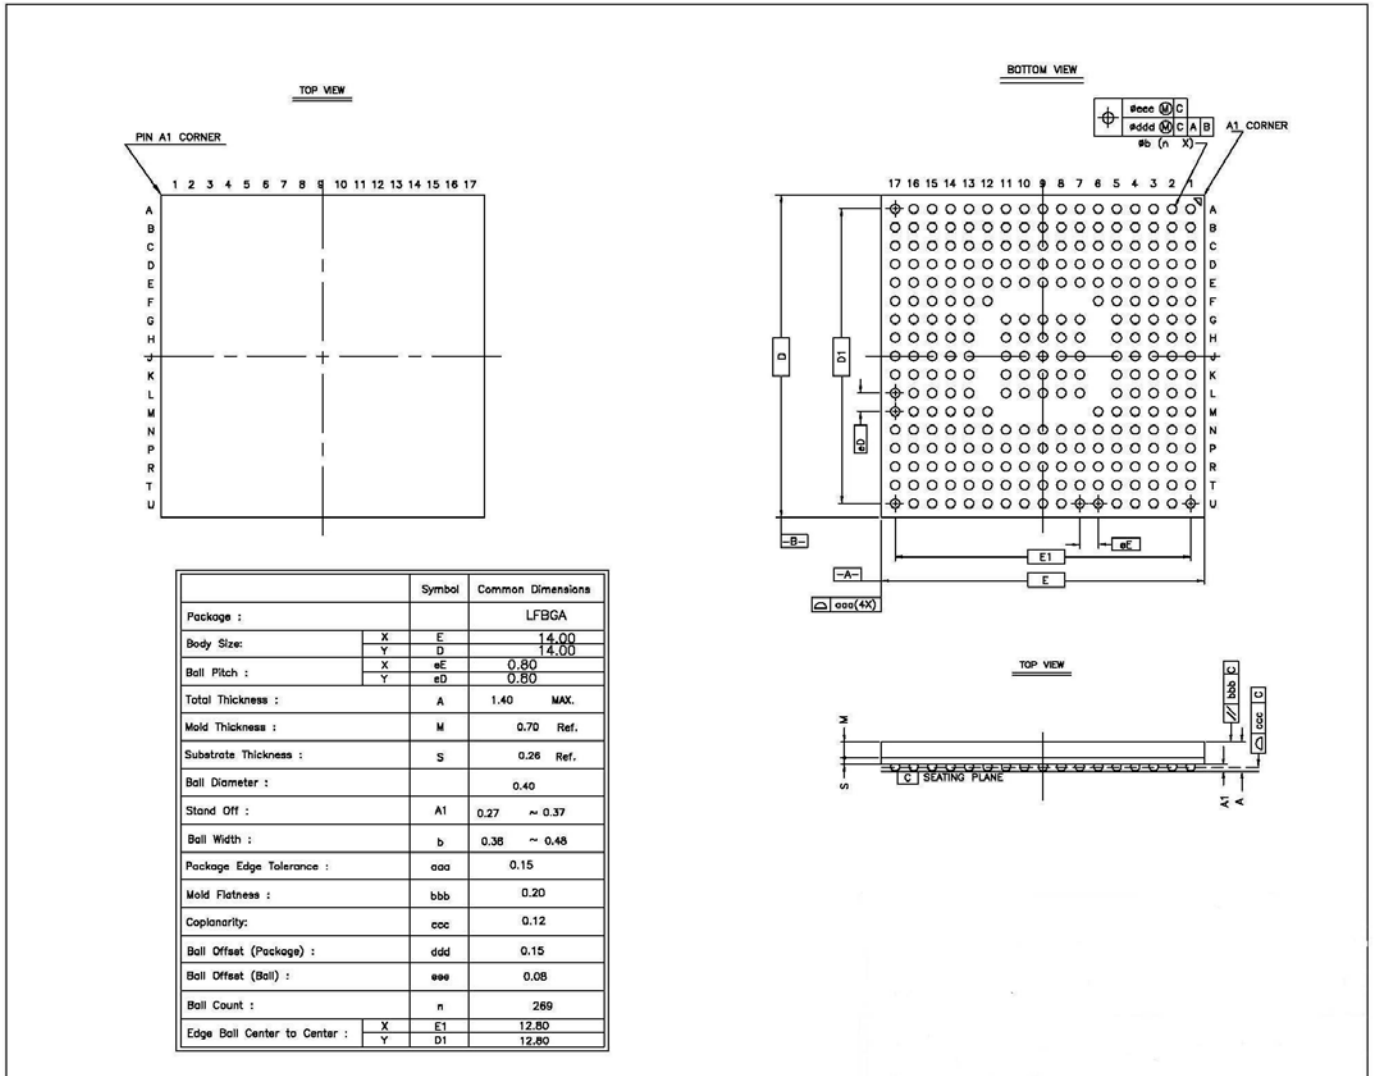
STR8133/CNS2133 Package Outline and Dimensions-LFBGA-269
